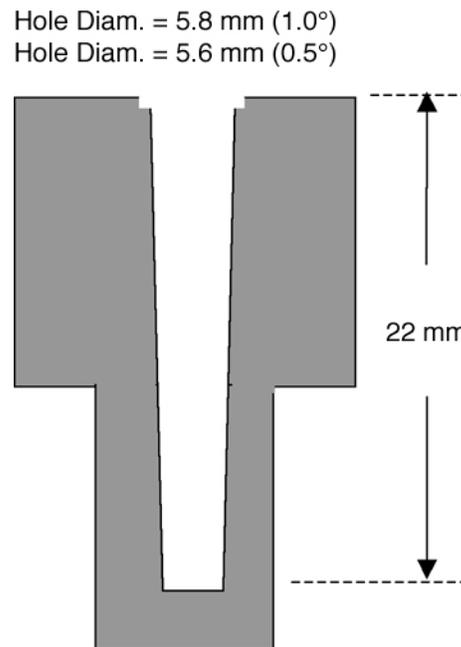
Cross section of nut specimen with blind hole at two draft angles (0.5° and 1.0°).
